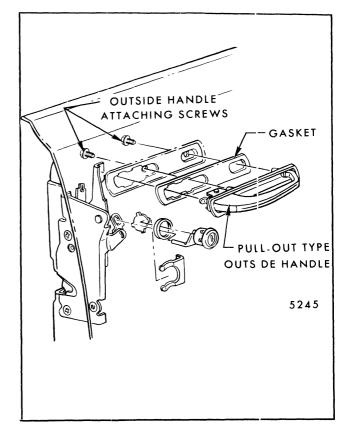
Door Outside Handle Removal - (Pull-Out Type)
